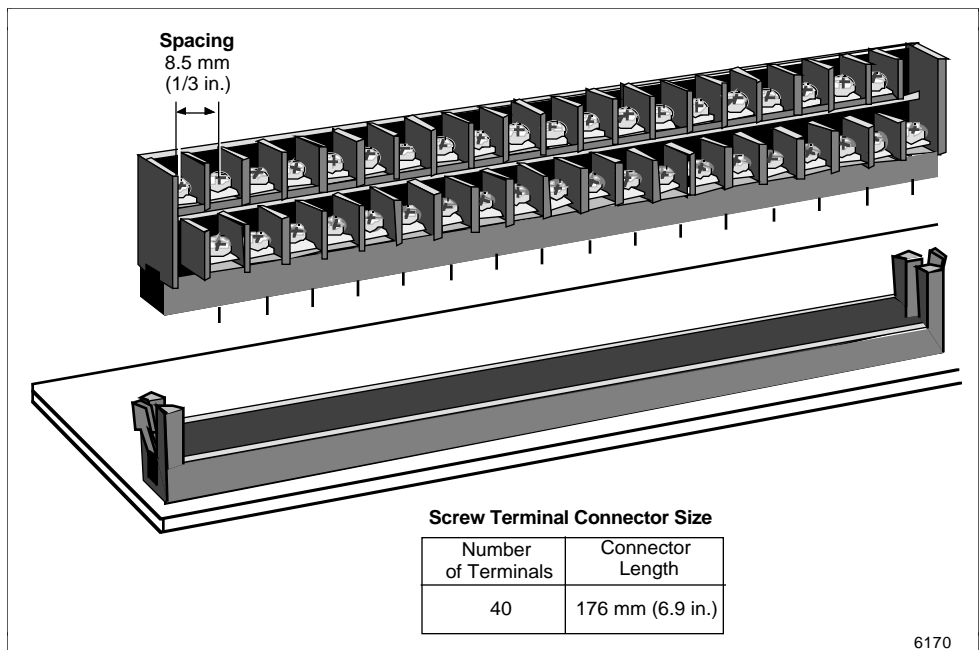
Typical FTA Fixed-Screw Terminal Strip
